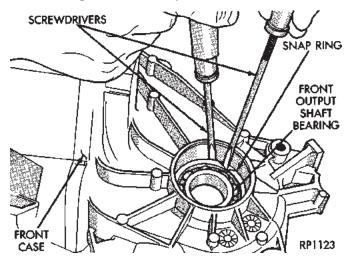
Front Output Shaft Bearing Retaining Ring Removal
